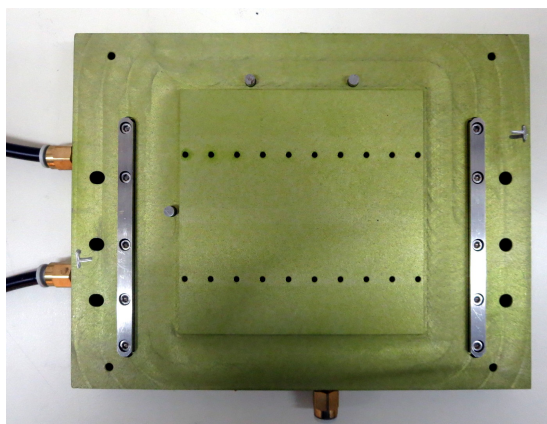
Vacuum jig for module assembly: a sensor is positioned with respect to alignment holes by using it against three alignment pins located around the central vacuum area. Hybrids are placed on top of the sensor using the same hybrid pick-up tool also used for hybrid assembly, which is positioned using precision alignment holes in the vacuum jig.
